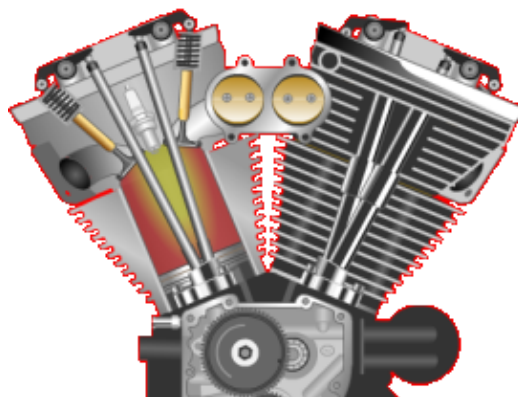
View of a Harley-DavidsonTMTwin cam engine [6]
